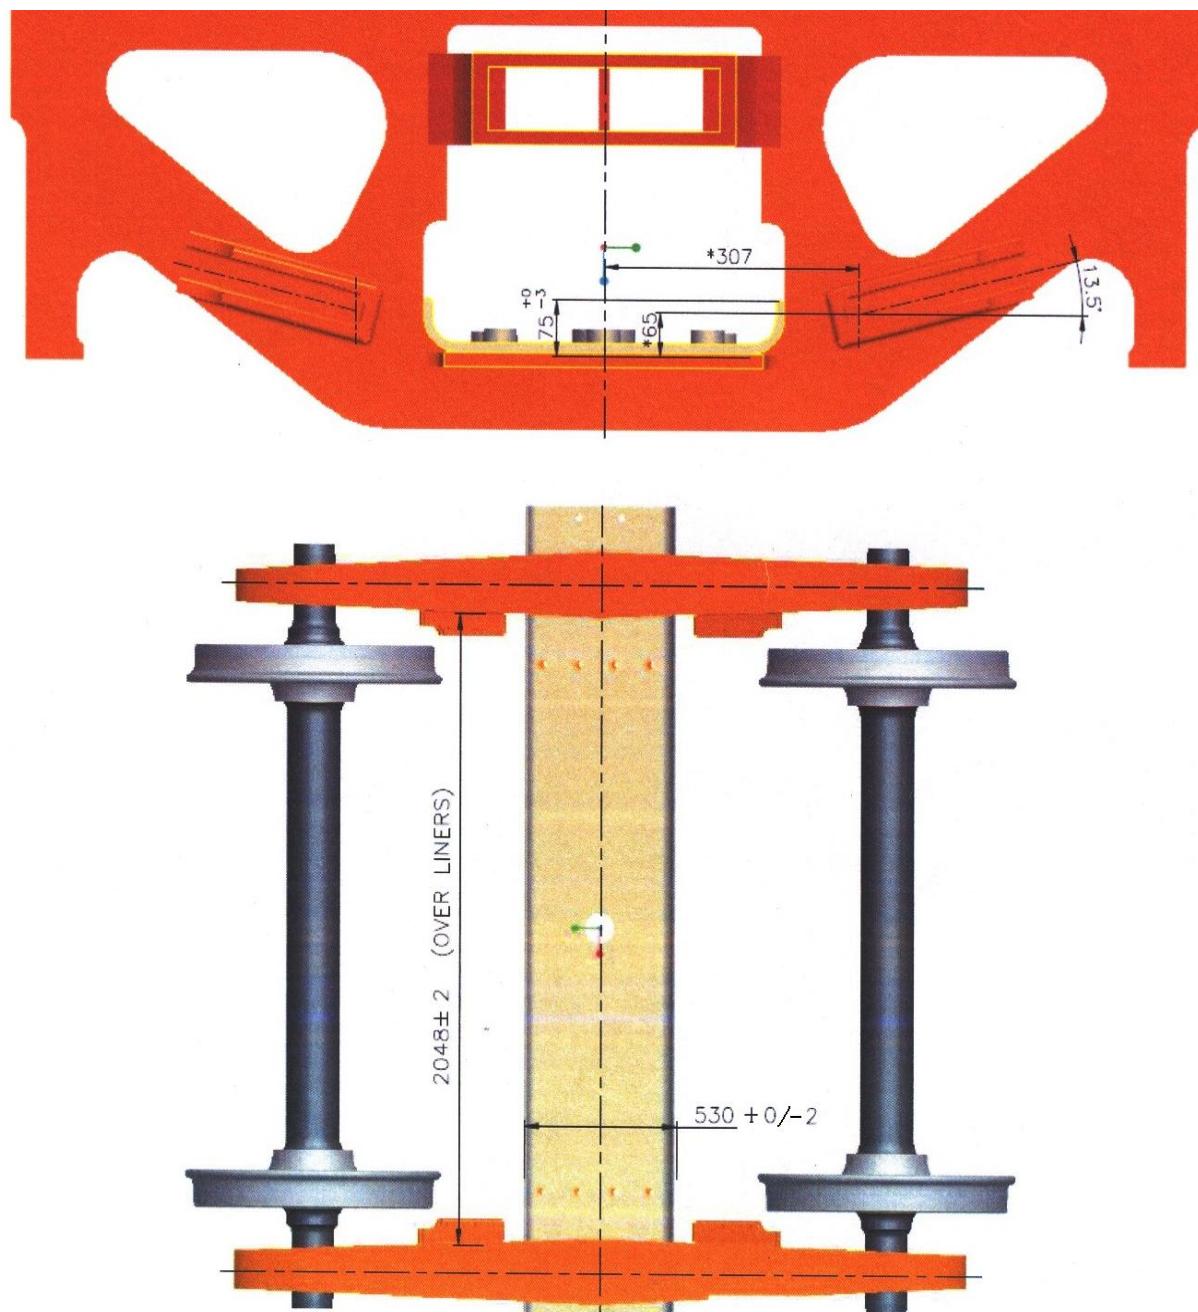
CRITICAL BOGIE DIMENSION
